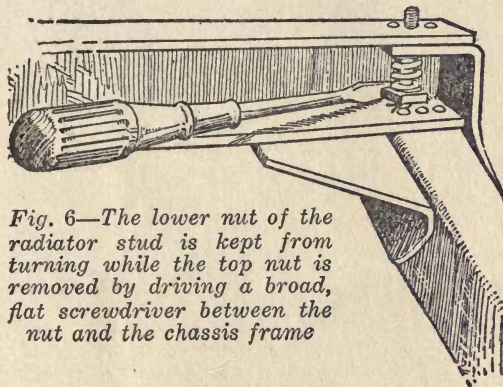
The lower nut of the radiator stud is kept from turning while the top nut is removed by driving a broad, flat screwdriver between the nut and the chassis frame
